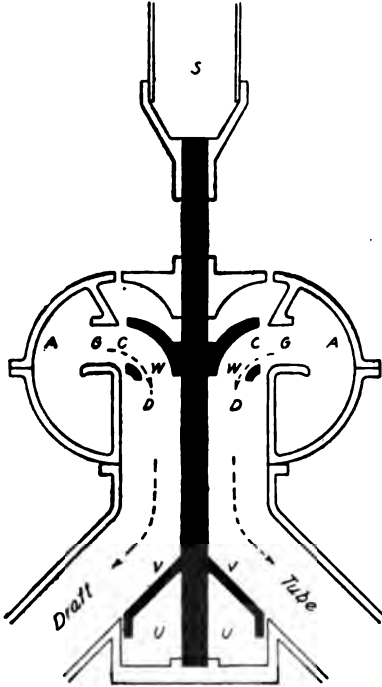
Thrust Piston Device for Single-Inflow Turbine.
